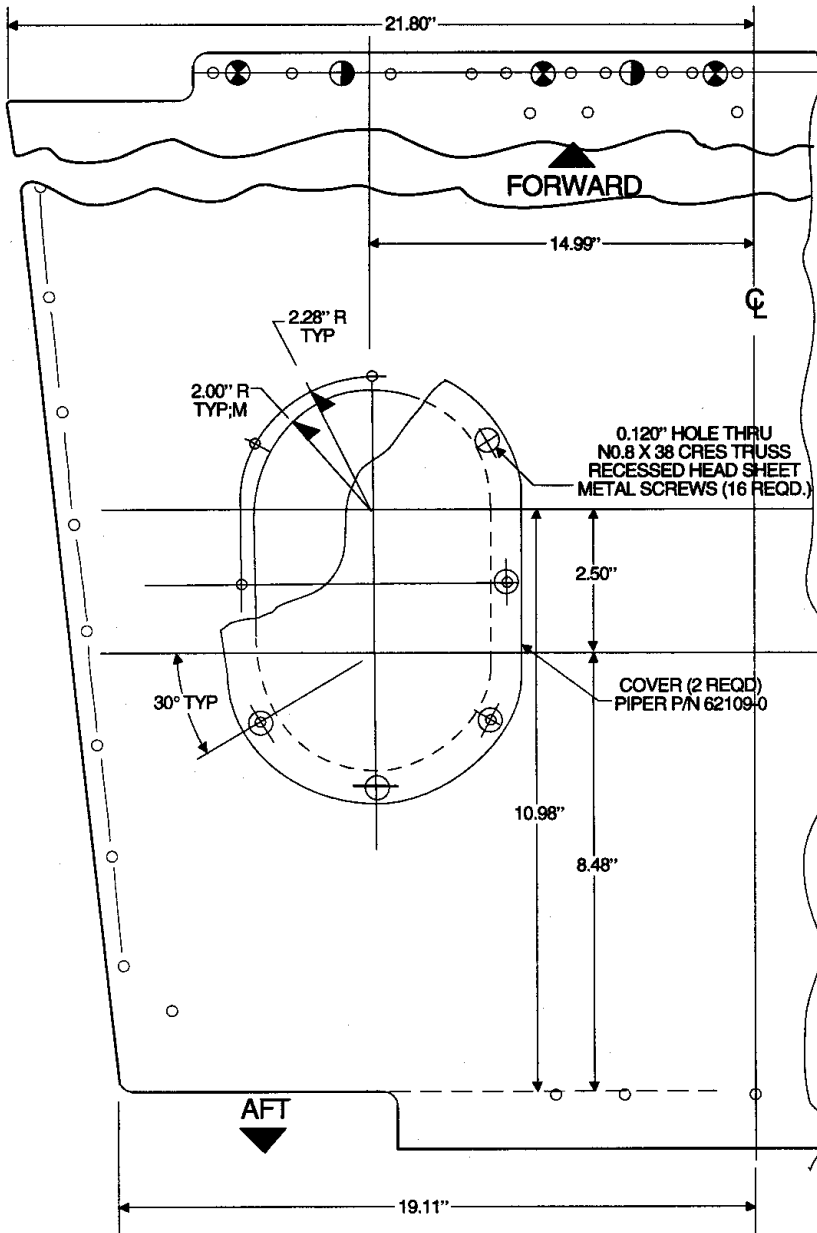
Baggage Compartment Inspection Holes Cutout Details
